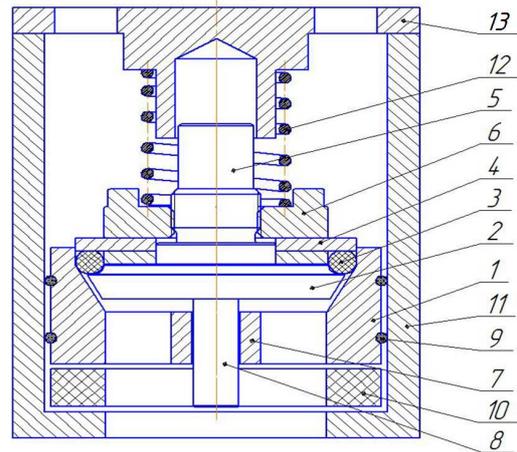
New valve design with an elastic element: 1 – valve seat; 2 – poppet; 3 – packing ring; 4 – bushing; 5 – limiters; 6 – nut; 7 – crosshead; 8 – valve spigot; 9 – packing seats; 10 – elastic element; 11 – pump housing; 12 – spring; 13 – valve cap.
